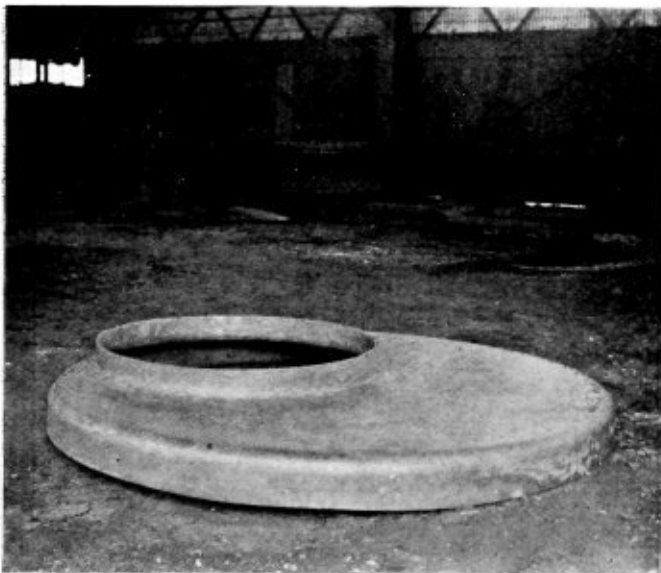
Scotch Marine Boiler Head Flanged on Spinning Flanger and Flue Hole Made on Sectional Flanging Machine
